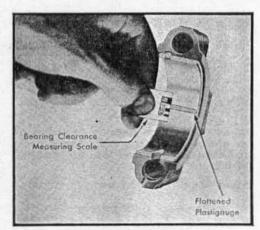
Checking bearing clearance with Plastigage, 1940-54
